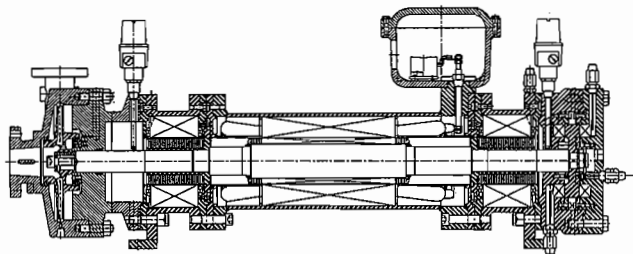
Magnetic Bearing Equipped Canned Motor Pump Cross Section.
